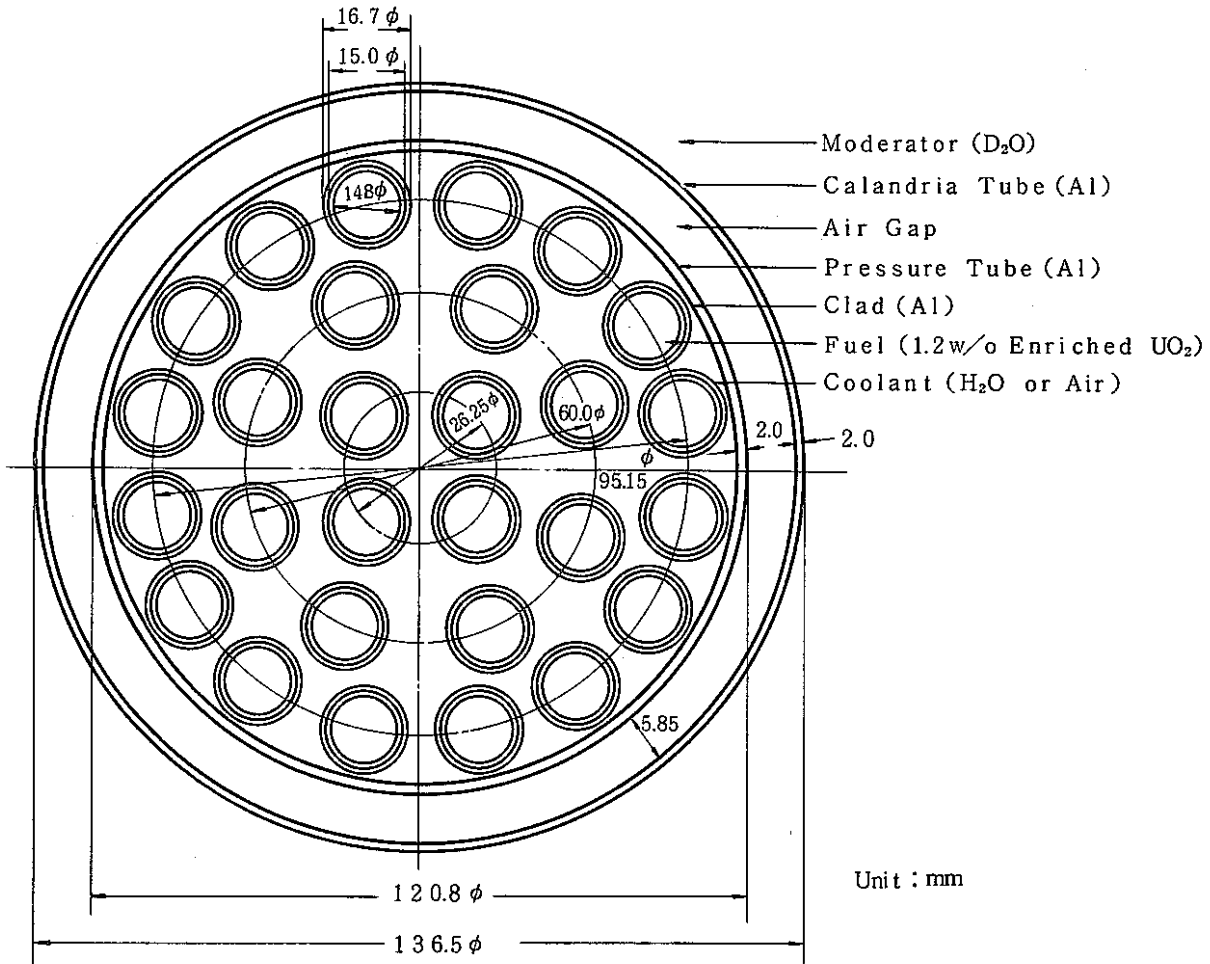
Cross-Sectional View of 28-Fuel-Rod Cluster
